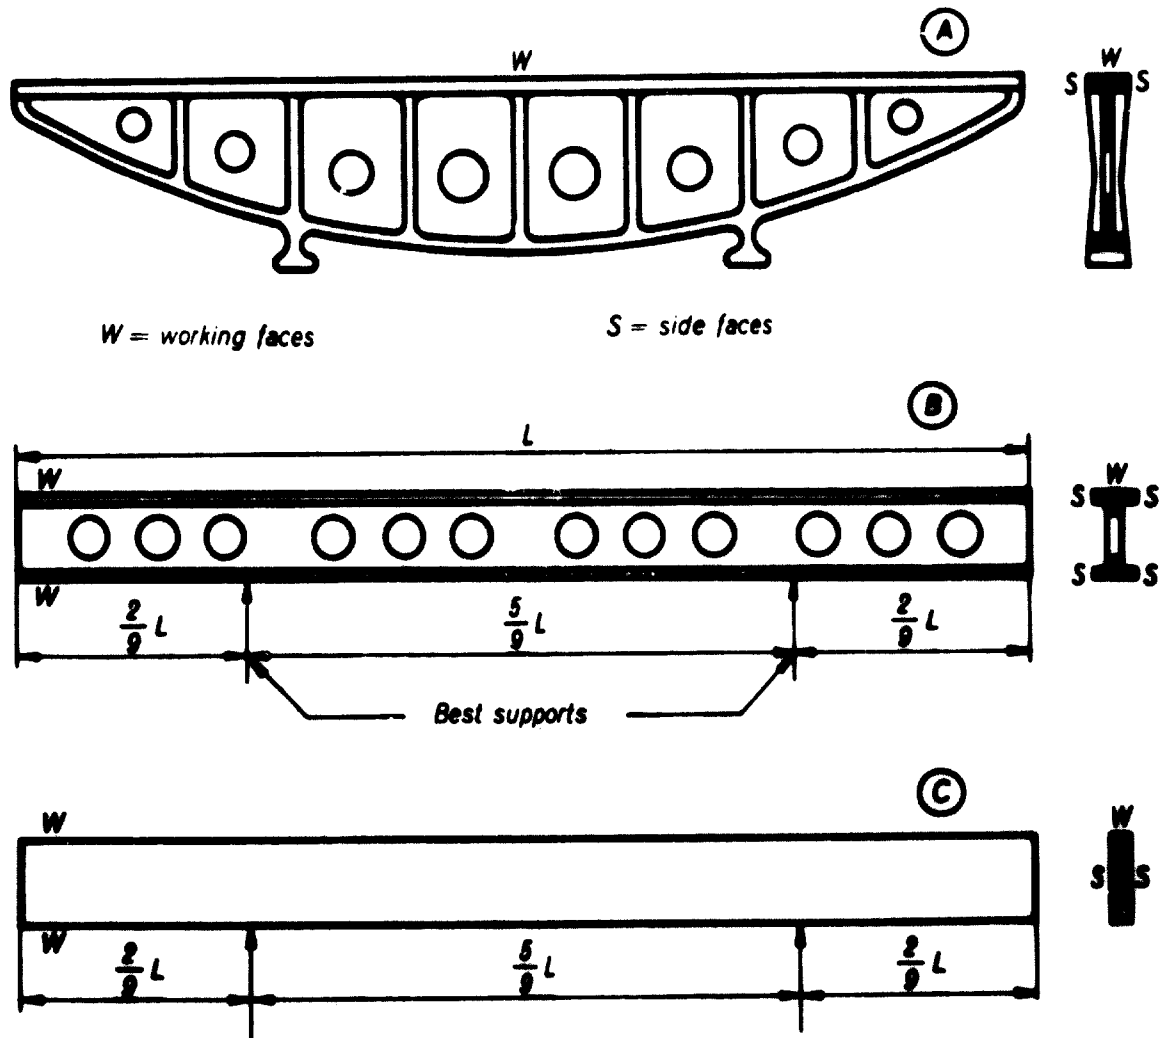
Principal types of straight-edge: A — bow-shaped straight-edge with a single edge; B — straight-edge with two parallel faces, of I-section with a solid or lightened web; C — straight-edge with two parallel faces, of plain rectangular section
